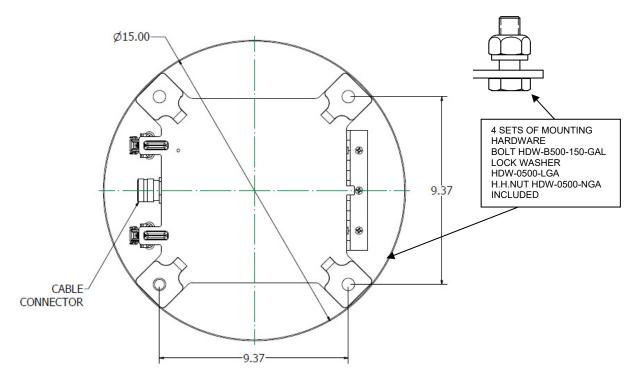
IFH-3600 Beacon Dimensions and Mounting Detail
